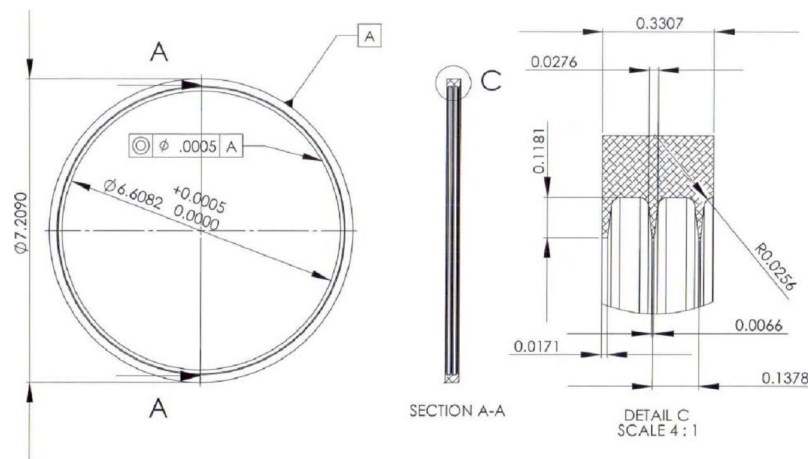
Dimensions of three-teeth labyrinth seal for leakage measurements.
